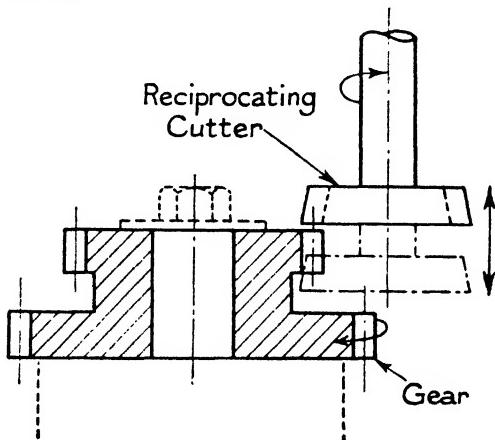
PRINCIPLE OF SHAPING TEETH OF CLUSTER GEAR
